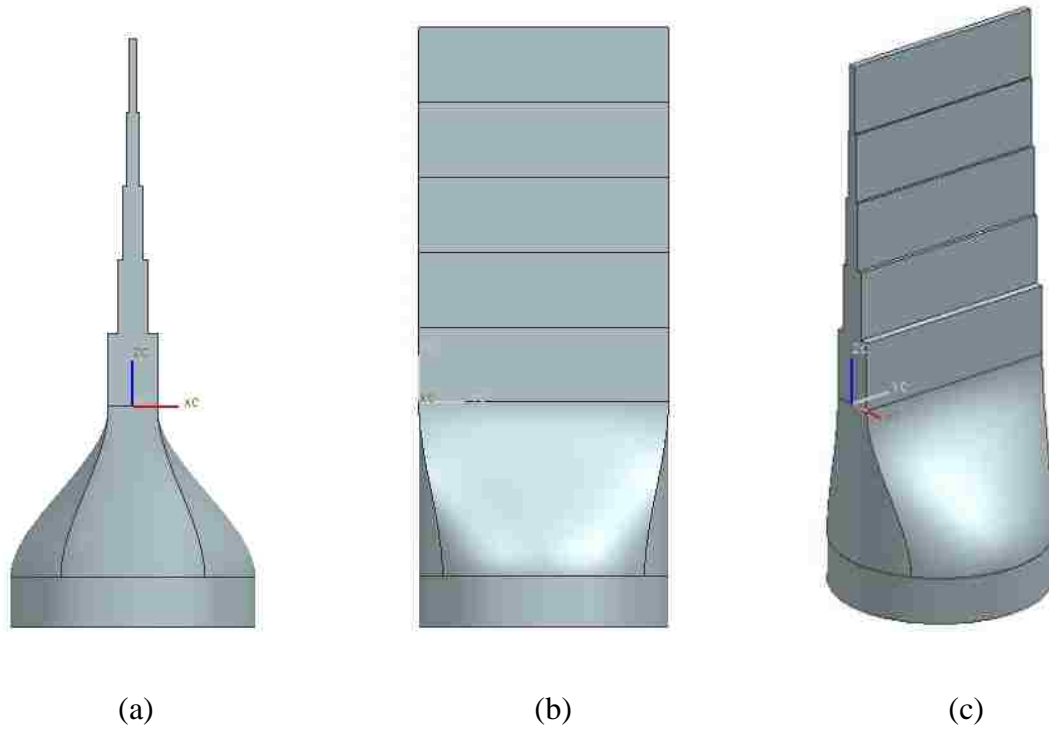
1: a) side view, b) front view and c) isometric view of 5-step casting 3-D model with the round-shape gating system.
